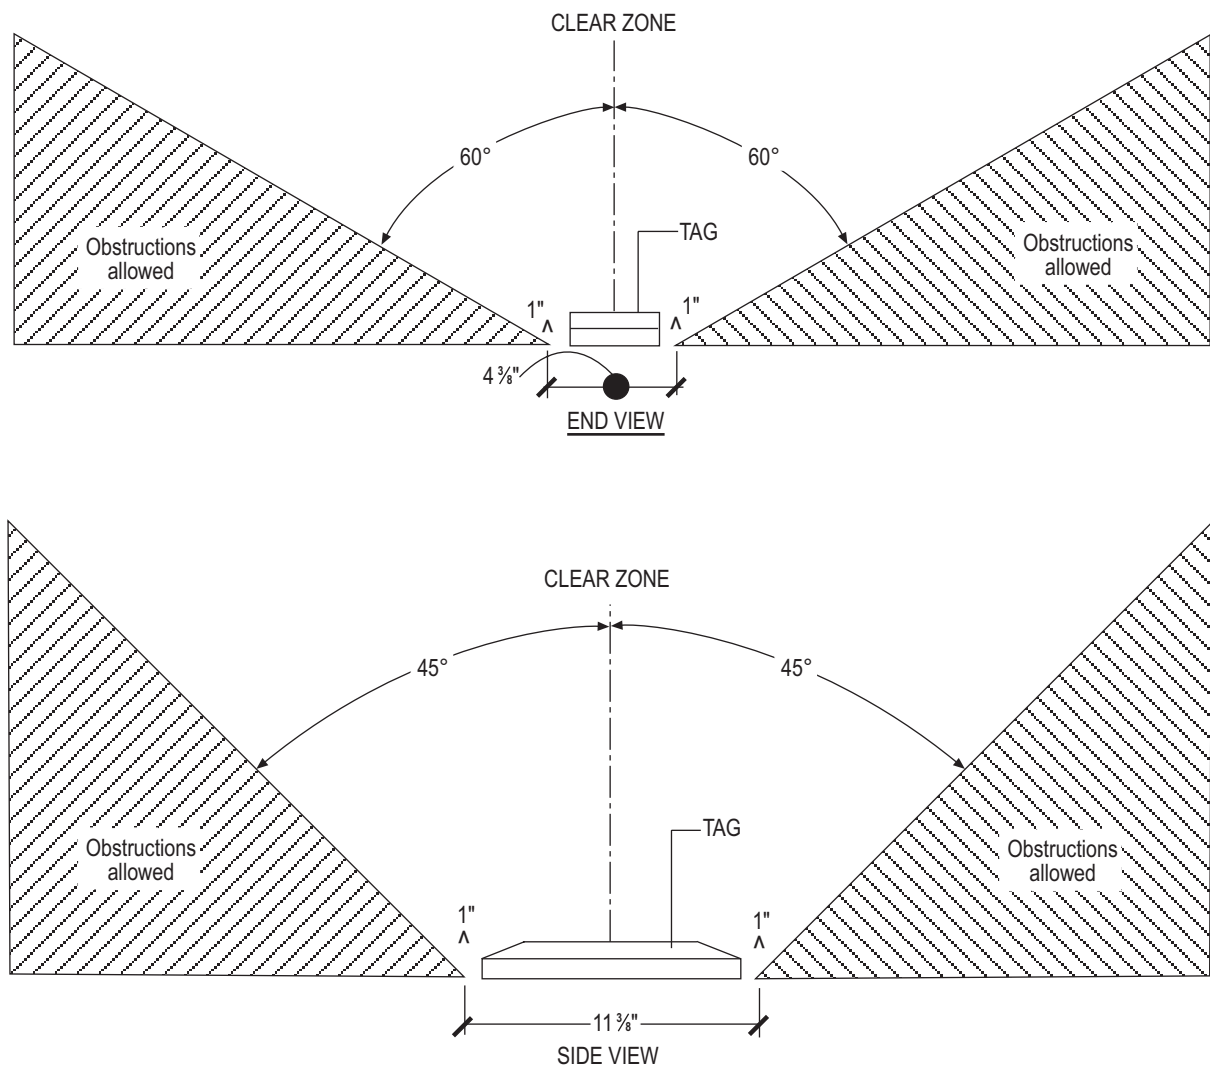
Tag mounting clearance zone railcars and locomotives
